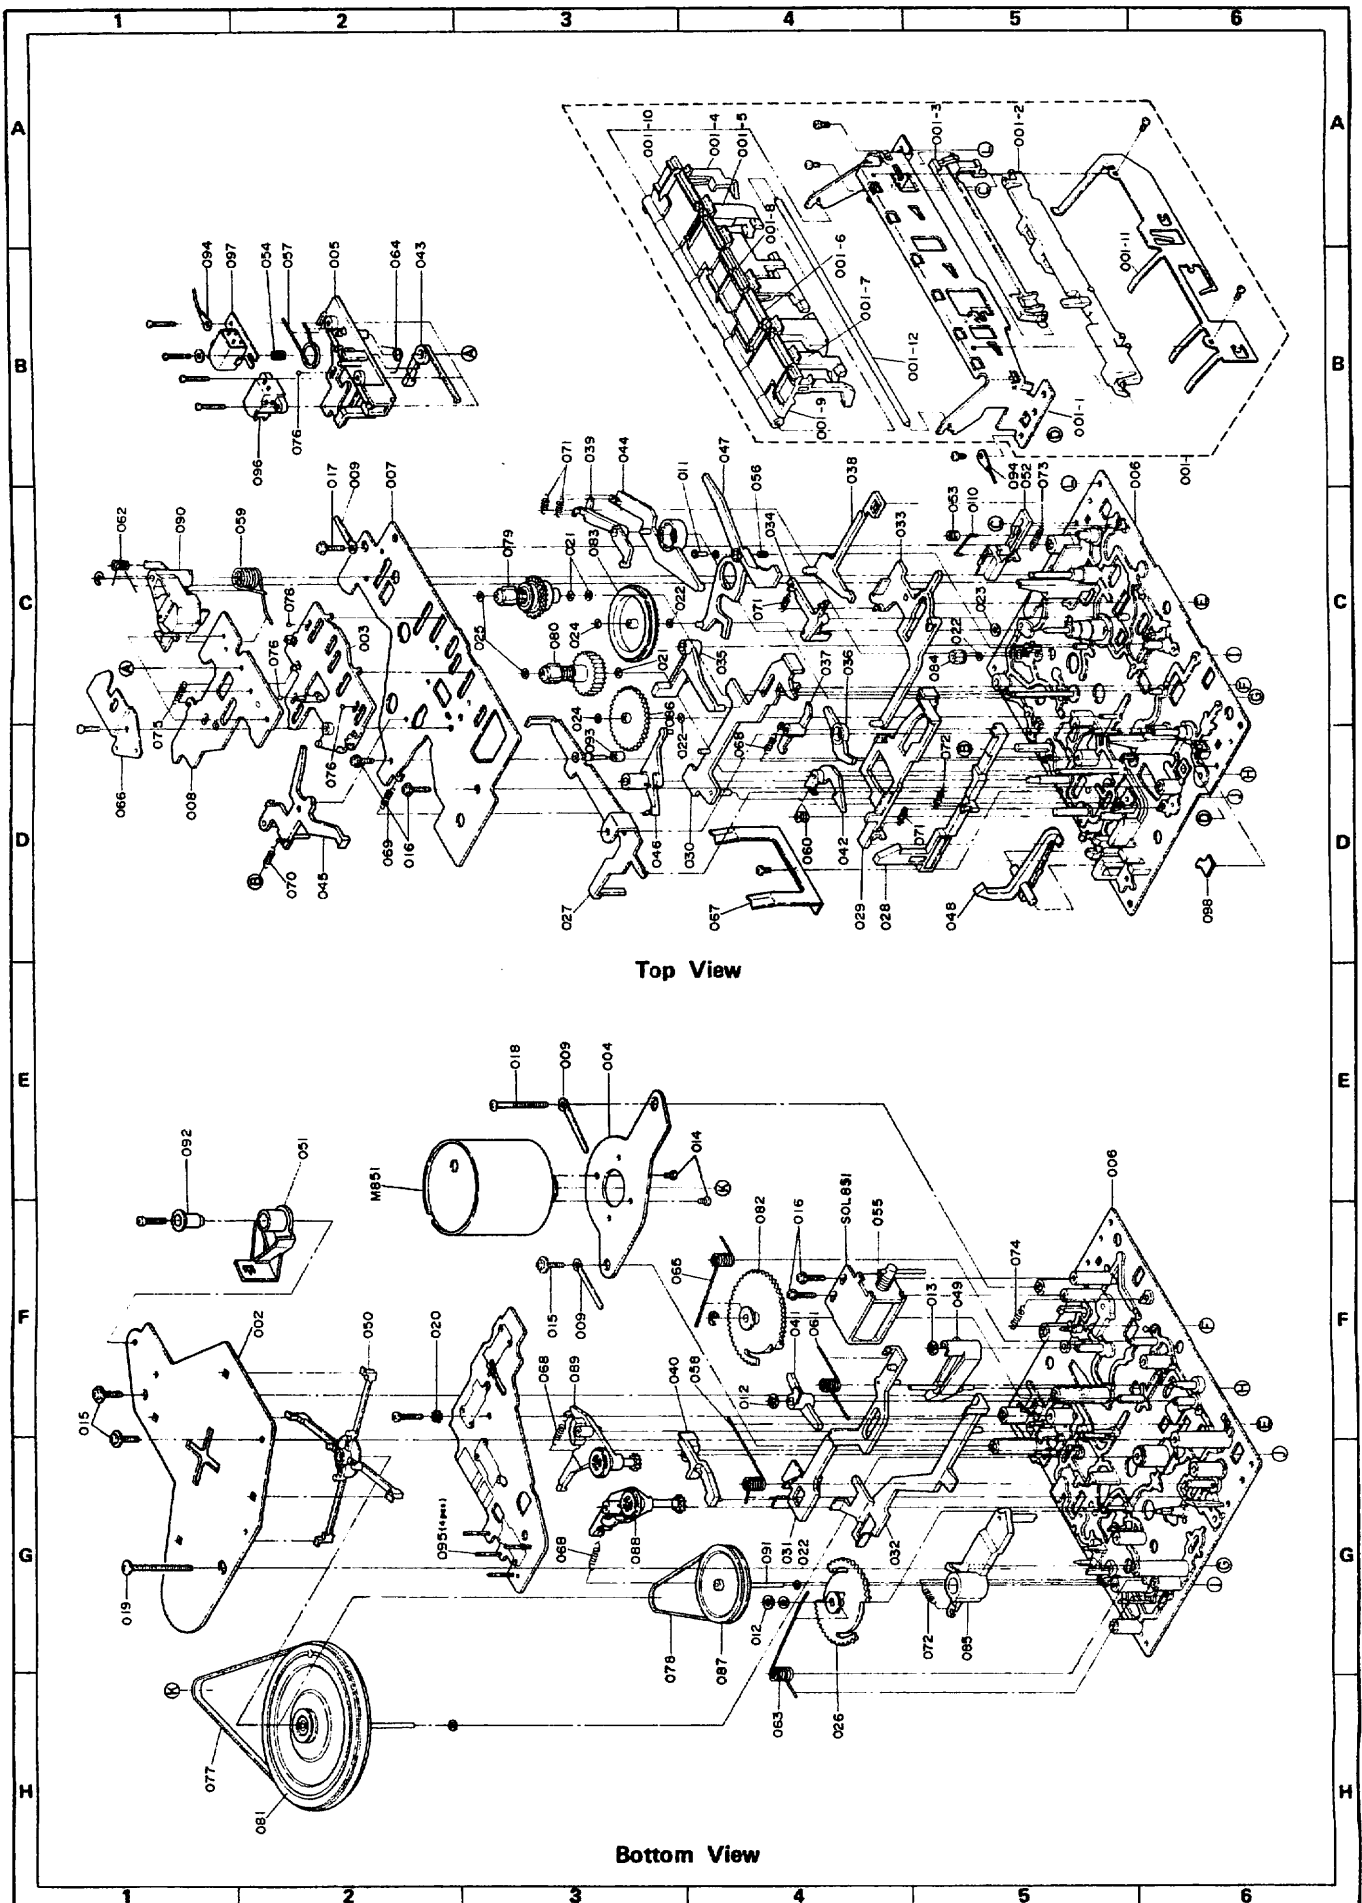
TAPE DECK MECHANISM EXPLODED VIEW
